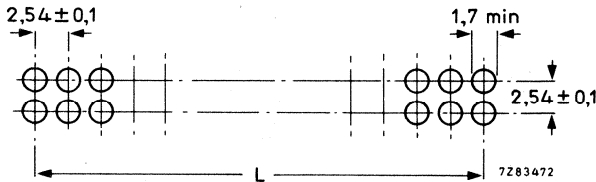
Hole pattern for double-row bottom-entry sockets; see Table 1 for dimension L.
